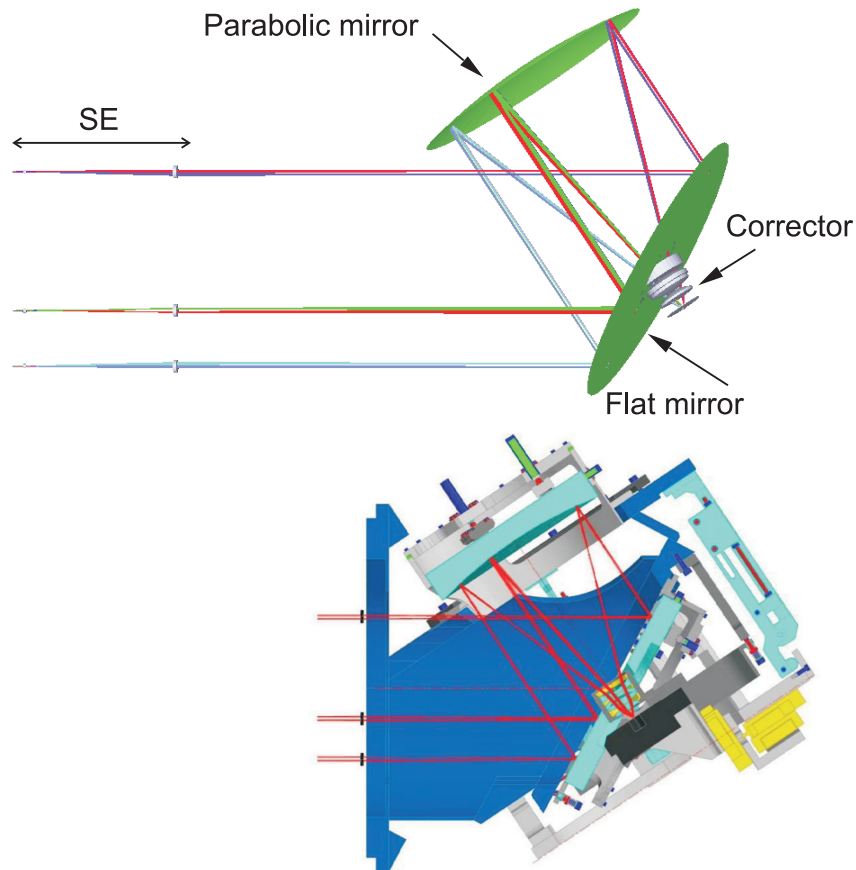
Optical layout of the Pupil Re-Imager (top) and CAD drawing of the optics and mechanics (bottom).
